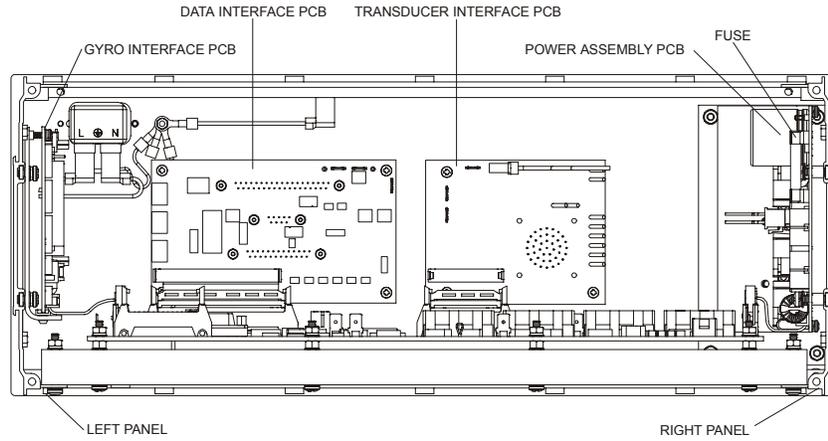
Electronic Chassis (Rear View - Looking Toward the Data Interface PCB)
